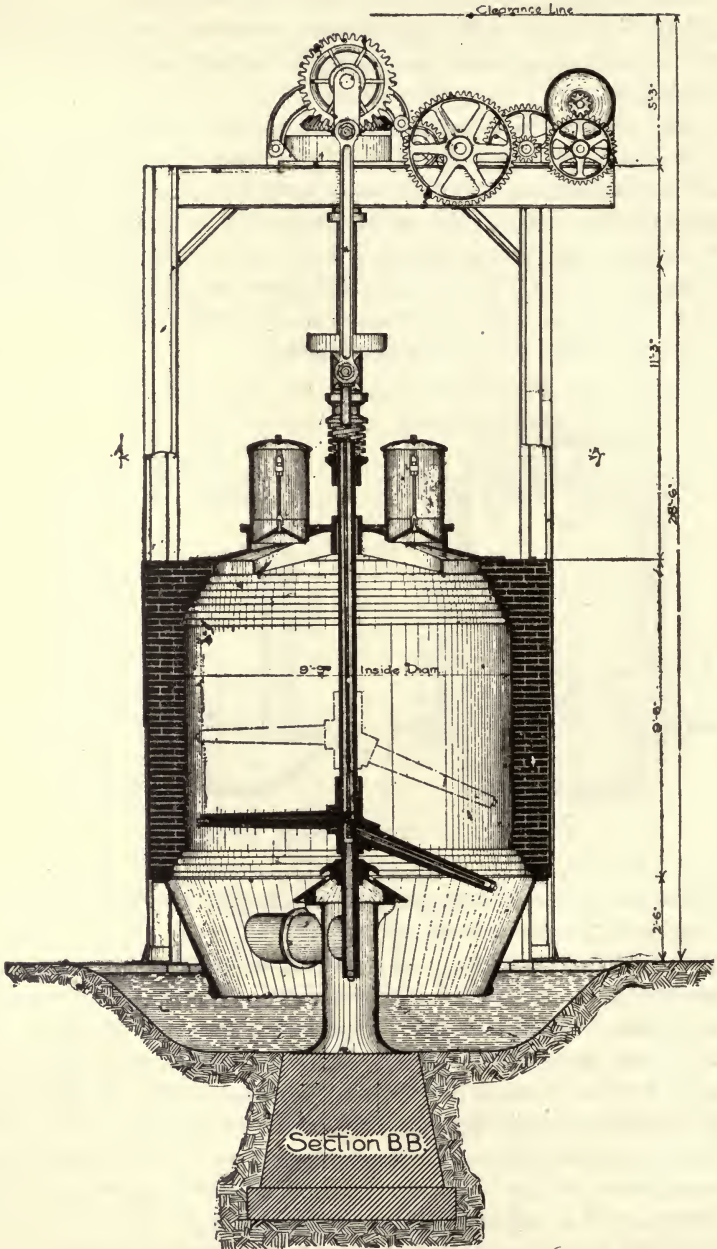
FIG. IX-B.—FRAZER TALBOT PRODUCER.
